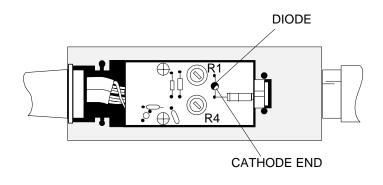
Model 5400-71B75 RF Detector Housing Layout Diagram
